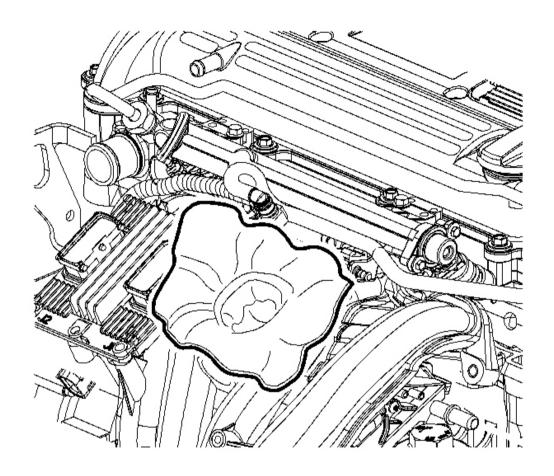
View Of Intake Manifold Opening With A Clean Shop Towel Courtesy of GENERAL MOTORS CORP.
